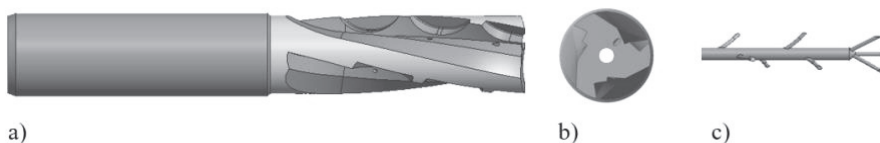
a) CAD-model of cutting shaft; b) cross section; c) cooling channel
